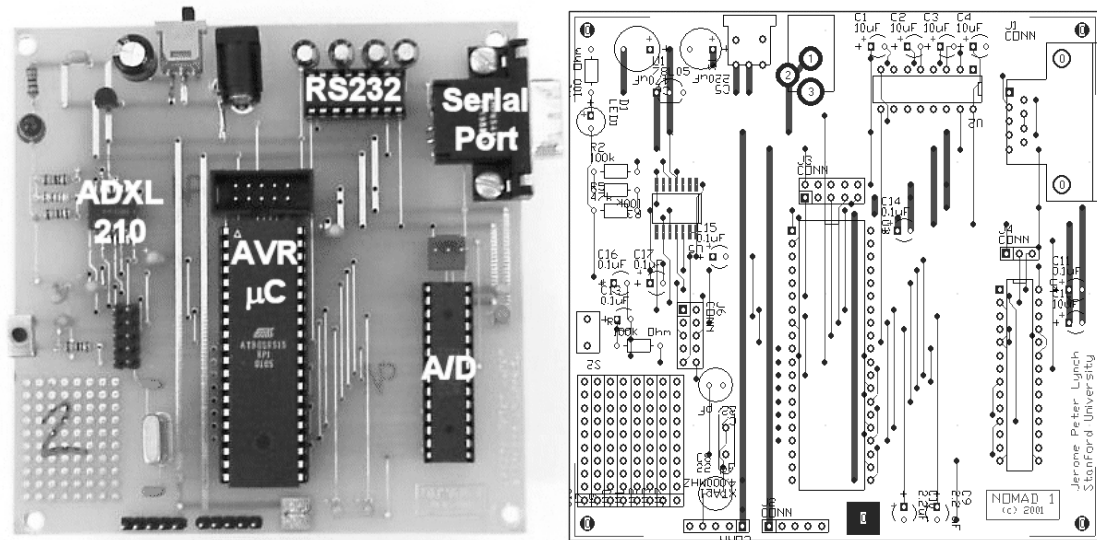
Printed circuit board (left) and top overlay layer design (right)
